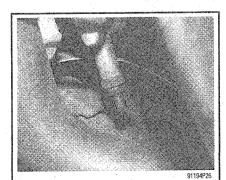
After the sensor is sufficiently loose using the drive tool, remove the sensor from the exhaust pipe by hand
